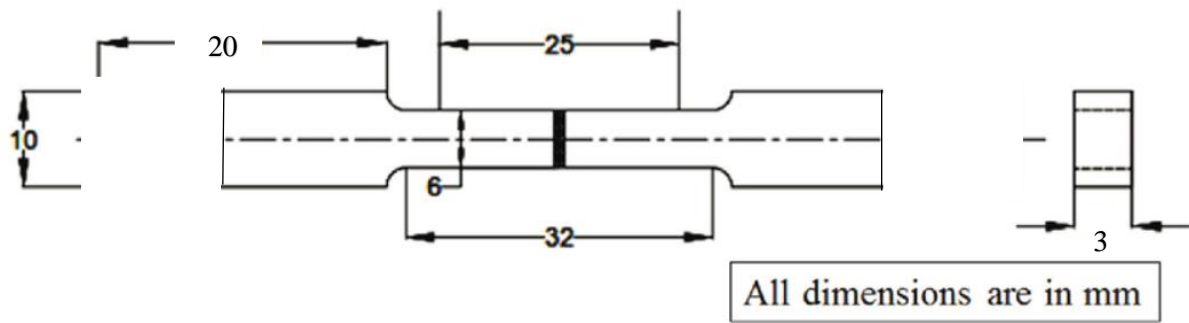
Dimensions of sample for cross weld tensile testing
